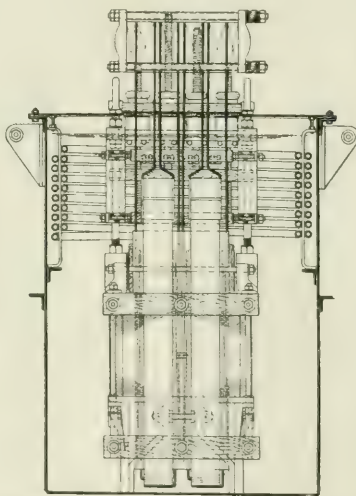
SINGLE-PHASE, 1,250 K.V.A. SHELL-TYPE FURNACE TRANSFORMER, WITH L.T. BOOSTER.
